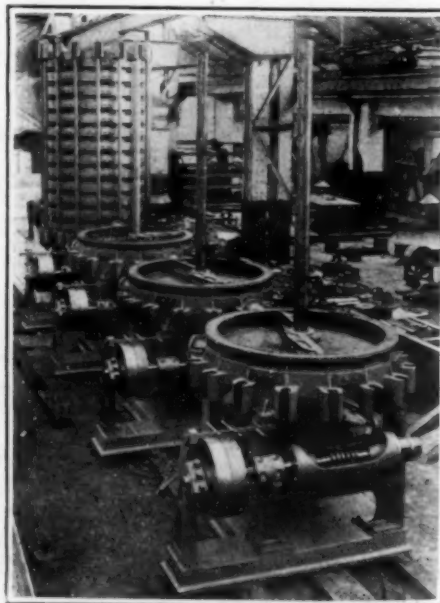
Oil Chiller in Construction Showing Interior of Oil Chamber With Scraping Mechanism for Removing Crystallized Wax
